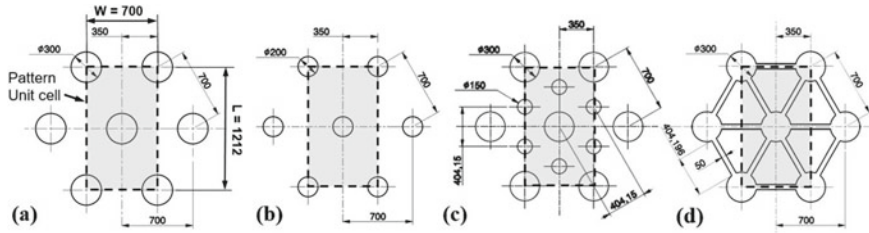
Micro-textures and geometrical parameters (μm). a MT1; b MT2; c MT3; d MT4
